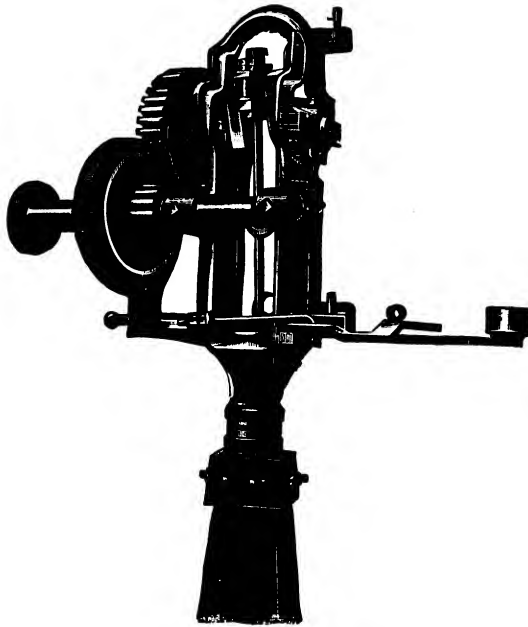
Crank and Connecting Rod Transmission Gear.
